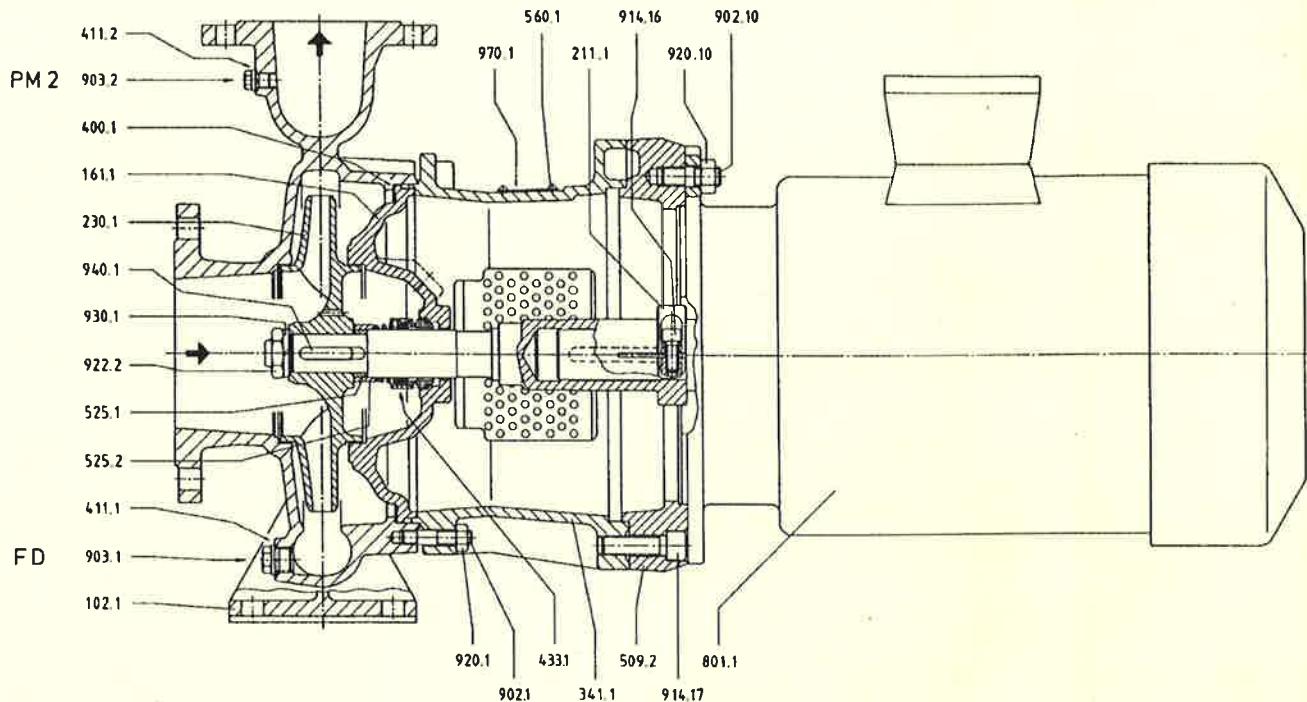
U3...D – Unbalanced mechanical seal – sizes with diameter 40 at the shaft seal
